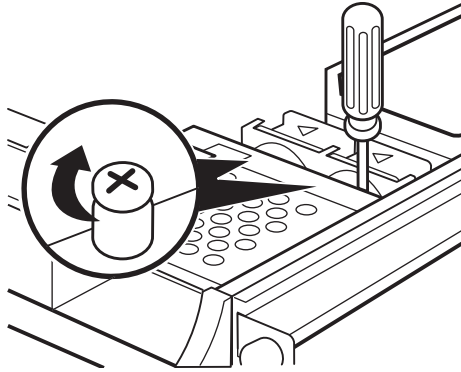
Tightening the SAS IF Assembly Screws
